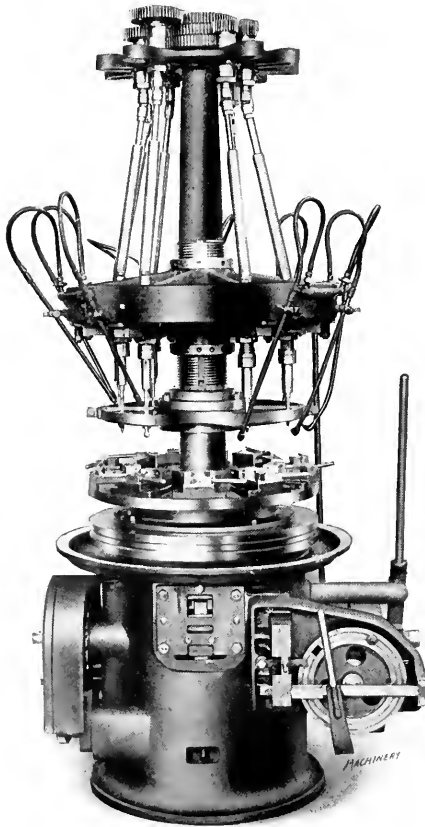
Front View of Gridley Automatic Multiple-spindle Drill
